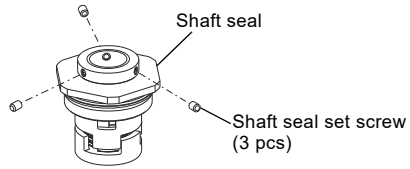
Shaft seal and shaft seal set screws for CR, CRI, CRN 1s, 1, 3, 5, 95, 125, 155, 185, 215, 255
